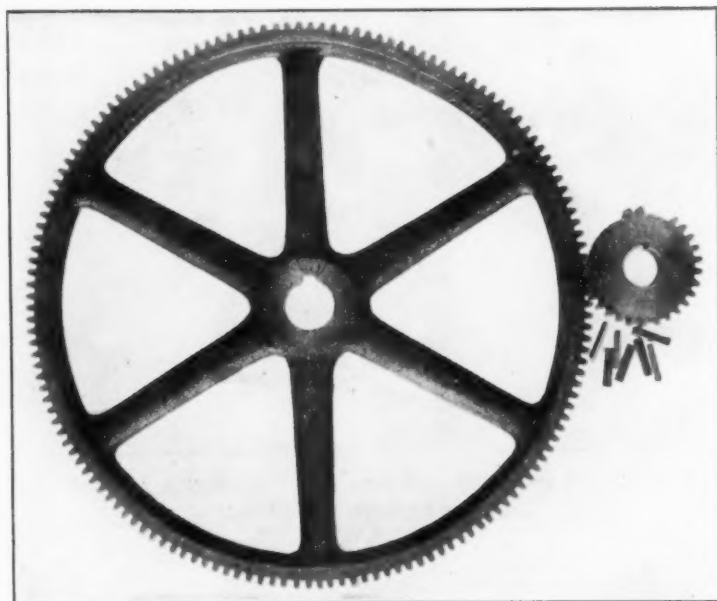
30 TOOTH ENGAGING 150 TOOTH, TEST 016, SERIES 1
